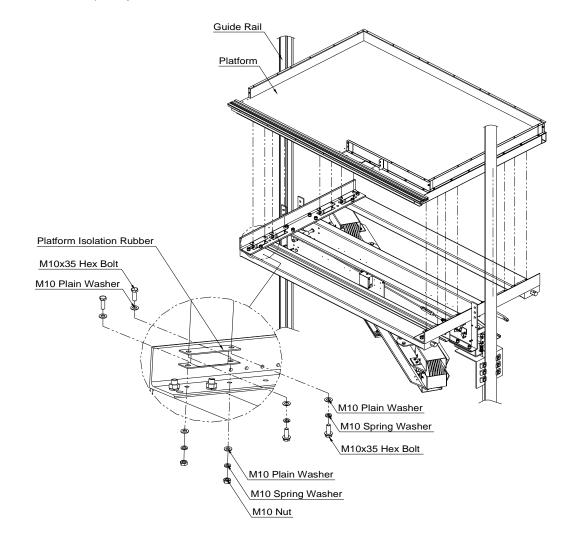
PLATFORM ASSEMBLY INSTALLATION
